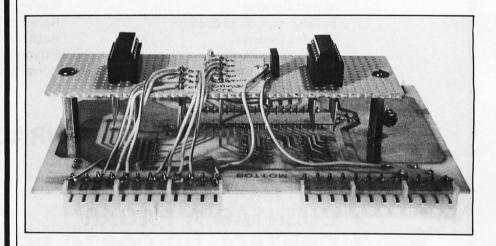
Shown here is the method of mounting the cycle-counter circuit board.
